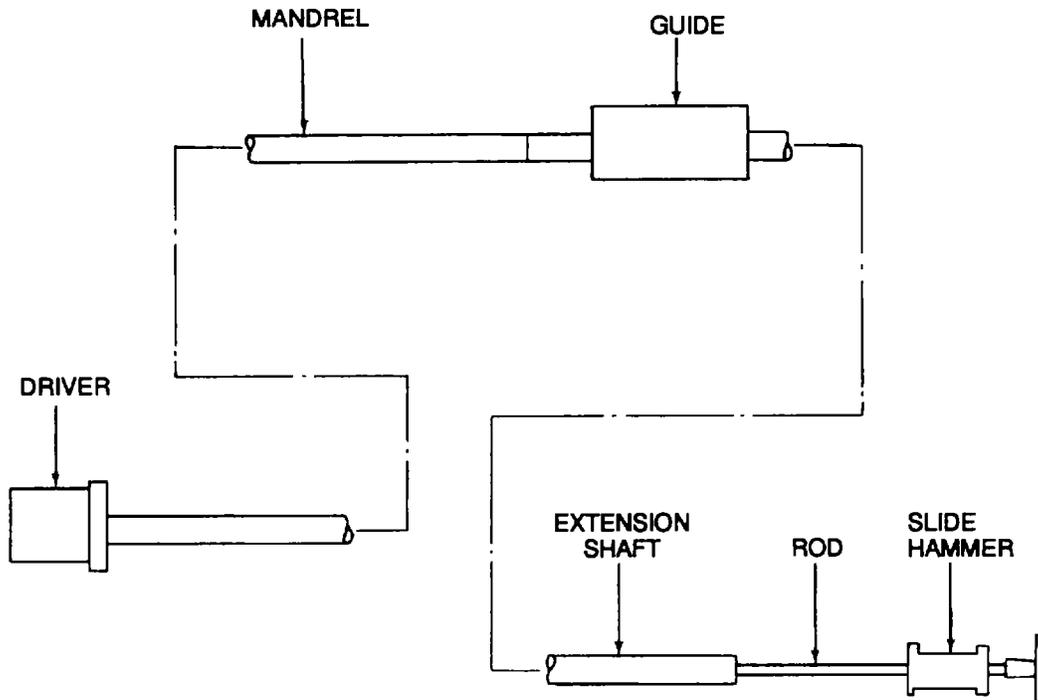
Camshaft Bushing Driver Set, ST-1 228
